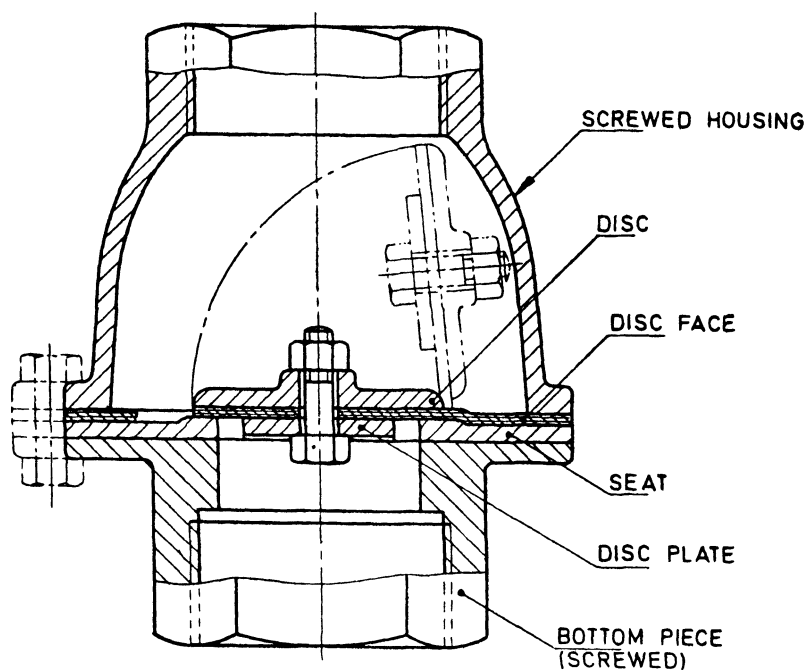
A TYPICAL SECTIONAL DRAWING OF SCREWED REFLUX VALVE TO BE USED IN SUCTION LINE OF AGRICULTURAL PUMP
